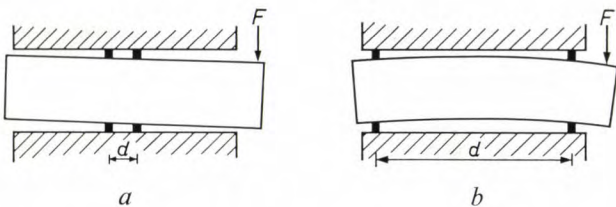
A force F acting on the projecting part of the headstock spindle presses the spindle sideways. A relatively large deviation may be caused by tilting of the whole spindle if the distance d between the bearings is small (a), and by flexing of the spindle if the distance between the bearings is large (b). Between these there is an optimum distance d which gives the least deviation.
